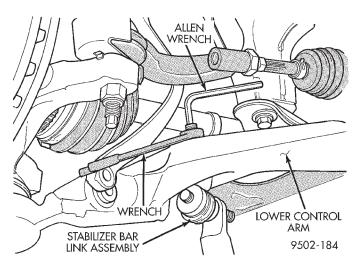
Stabilizer Bar Attaching Link Nut Removal
